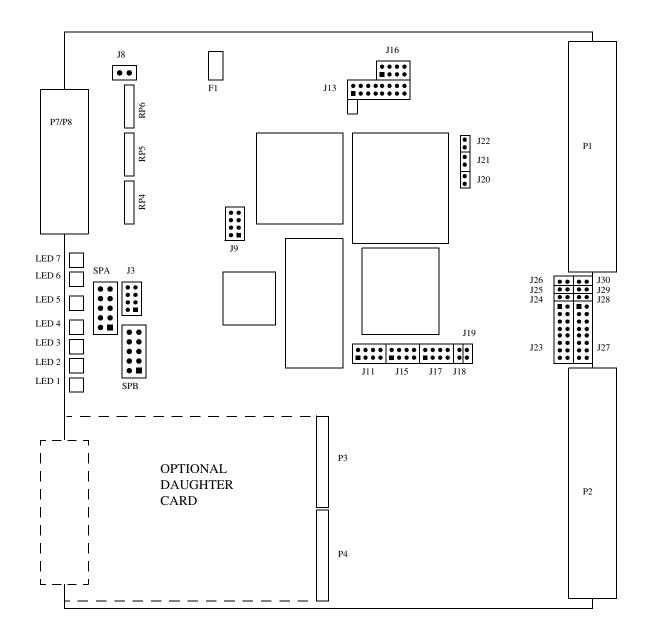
V/SCSI-2 4220 Cougar II Single-Ended Board Layout
